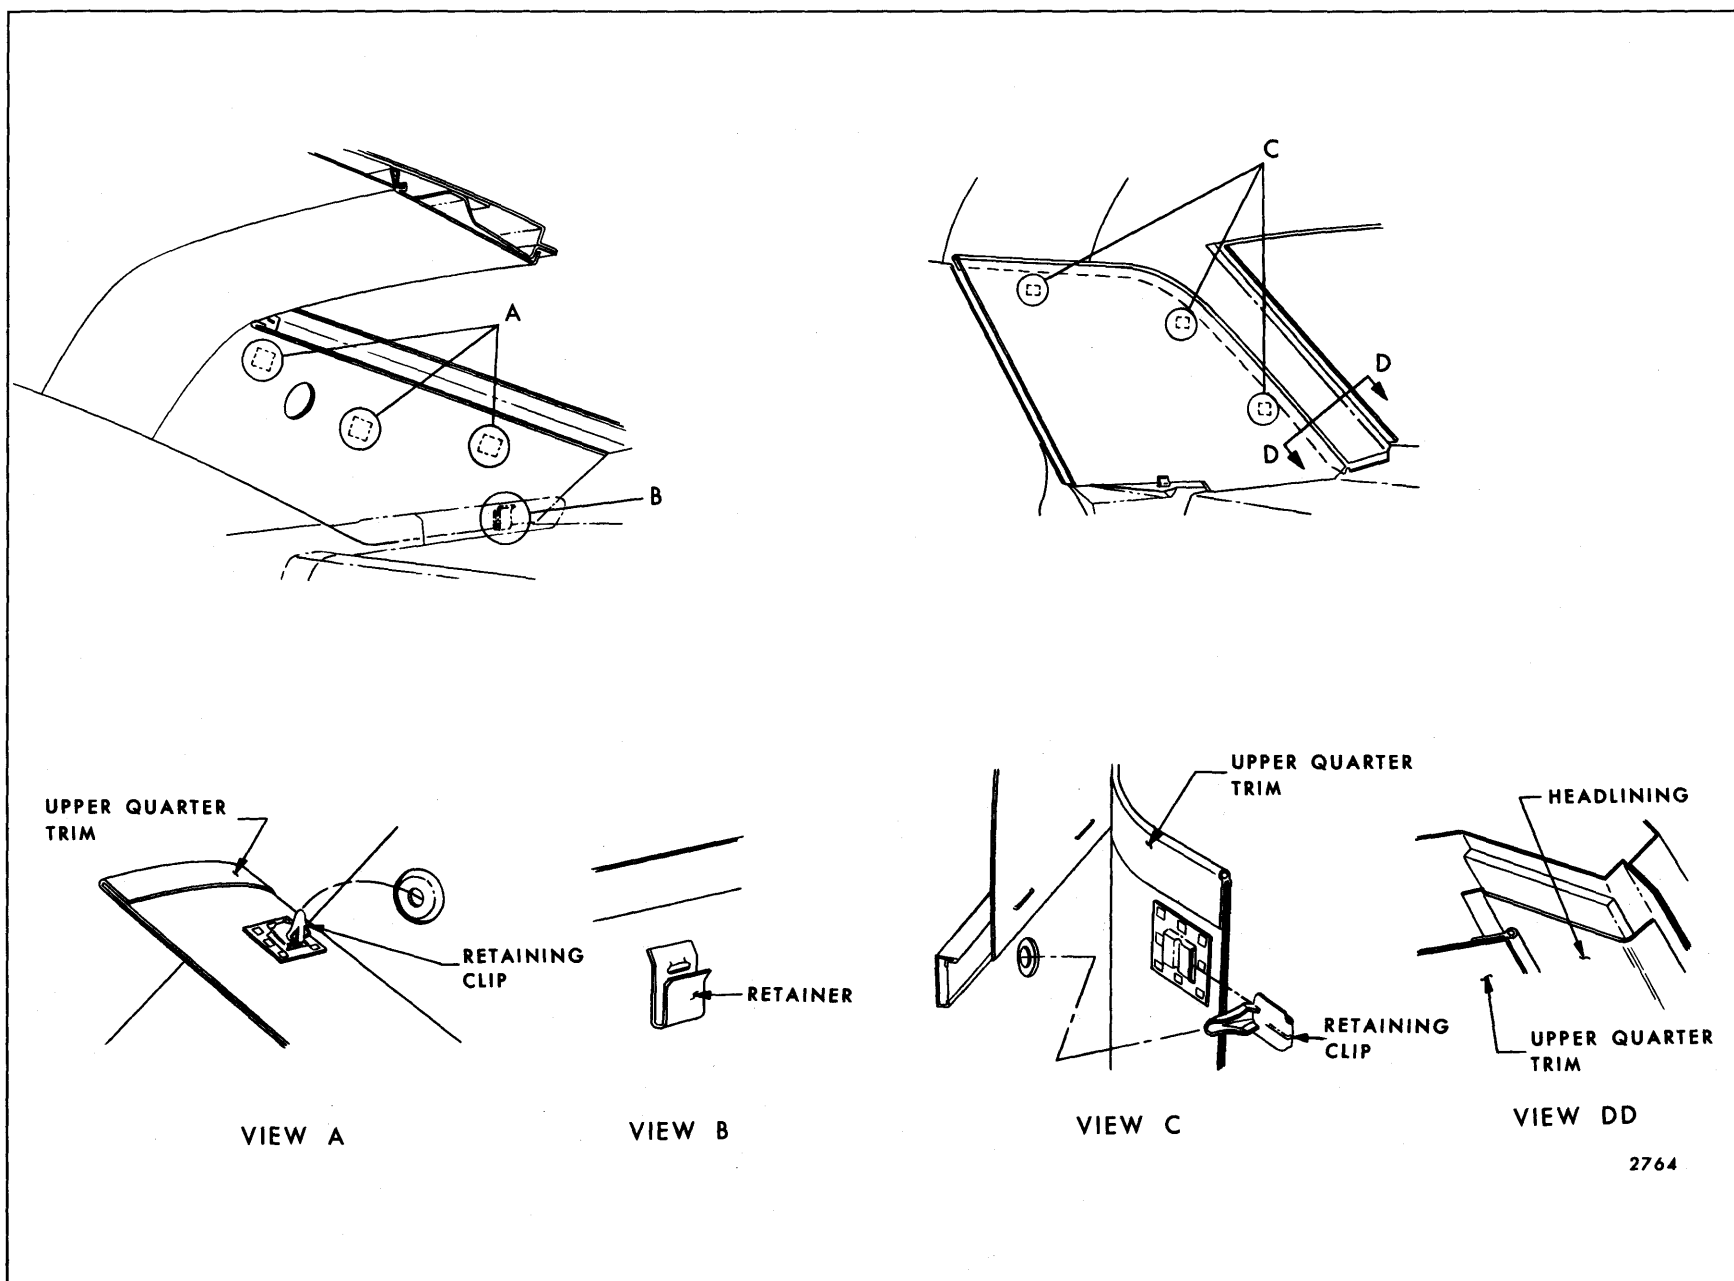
Typical Upper Quarter Trim Finishing Panels
